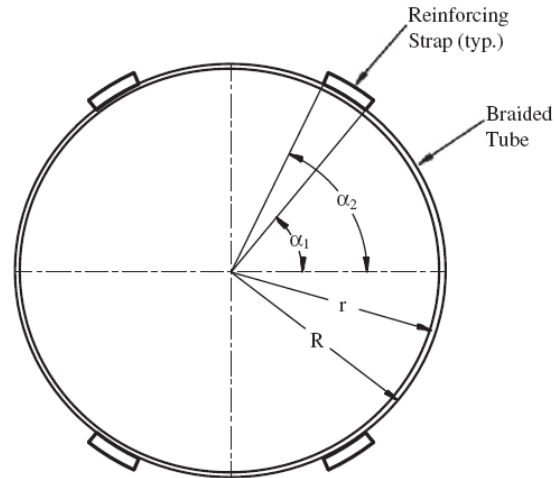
Cross-Section of Braided Member with External Reinforcing Straps [35]
